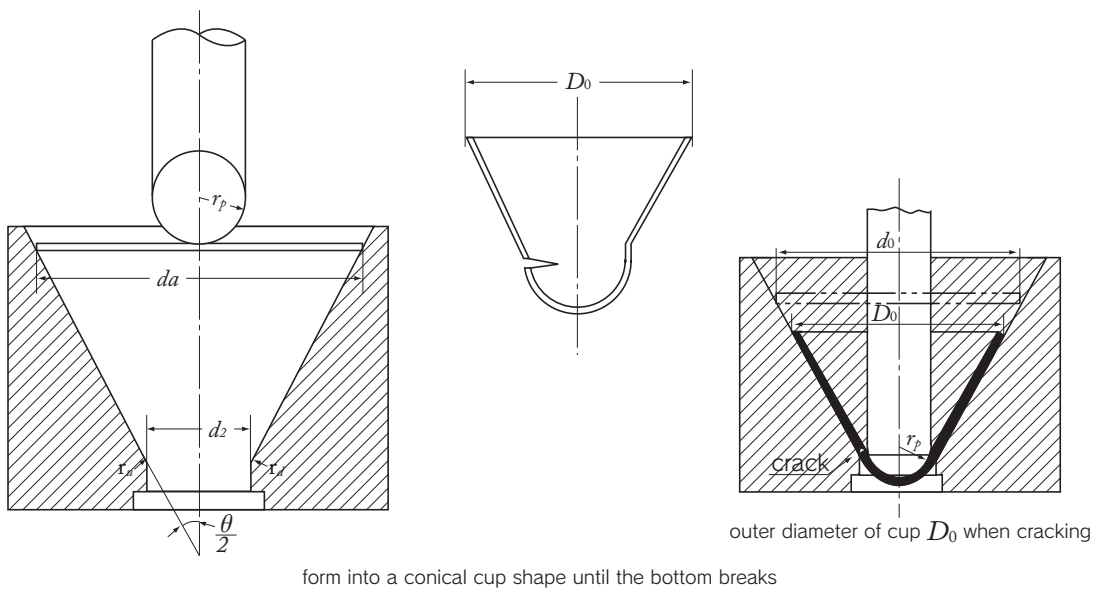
Schematic showing tool and specimen dimensions for the conical cup test
